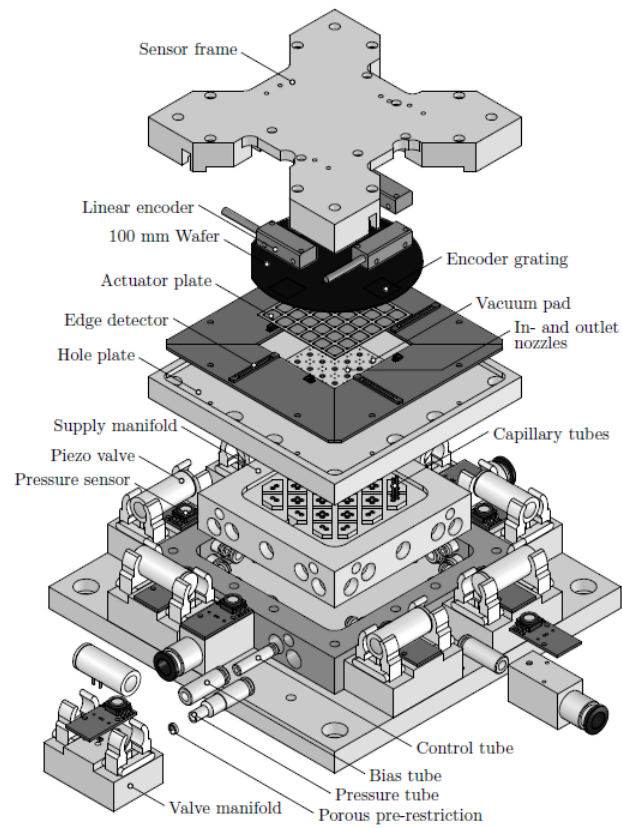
Exploded view of the contactless Waferstage setup [40].
